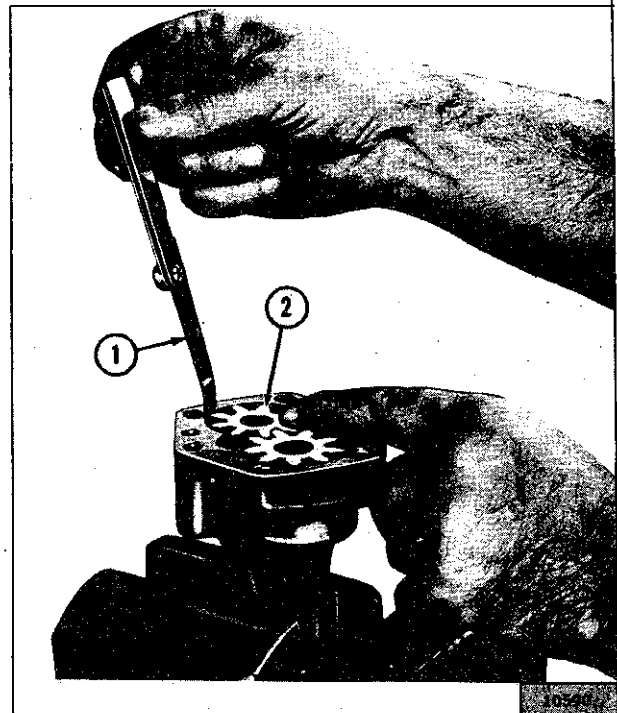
CHECKING GEAR TOOTH TO BODY CLEARANCE
